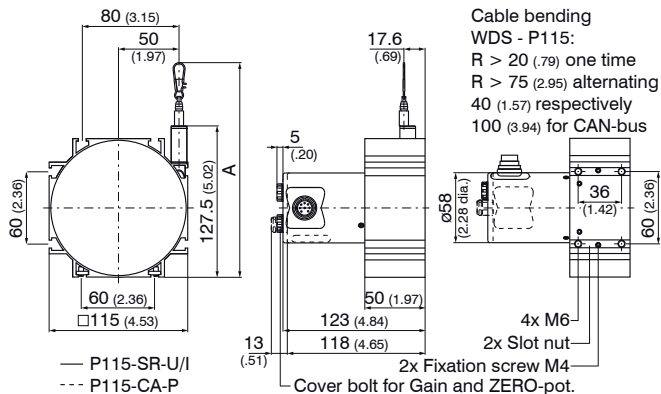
Dimensional drawing WDS- ... - P115 - U/I/P, measuring ranges 3,000 ... 5,000 mm, dimensions in mm (inches), not to scale
